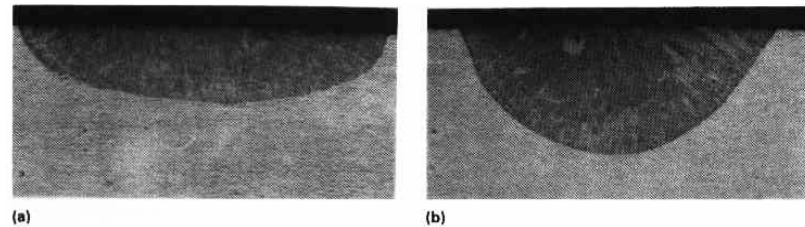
Partial penetration TIG welds made under the same welding condition on two heats of type 304L. (a) 3 ppm S, $d/w= 0.2$. (b) 160 ppm S, $d/w= 0.40$ (9X) (Christensen, 1965)
